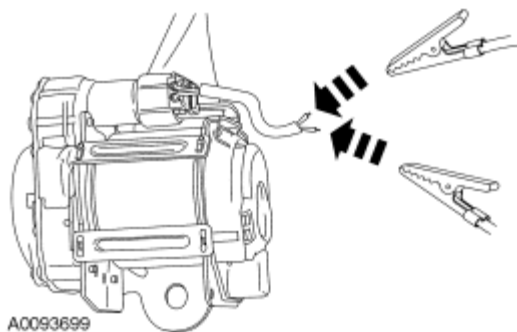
Attaching Jumper Wires To Safety Belt Retractor Pretensioner
